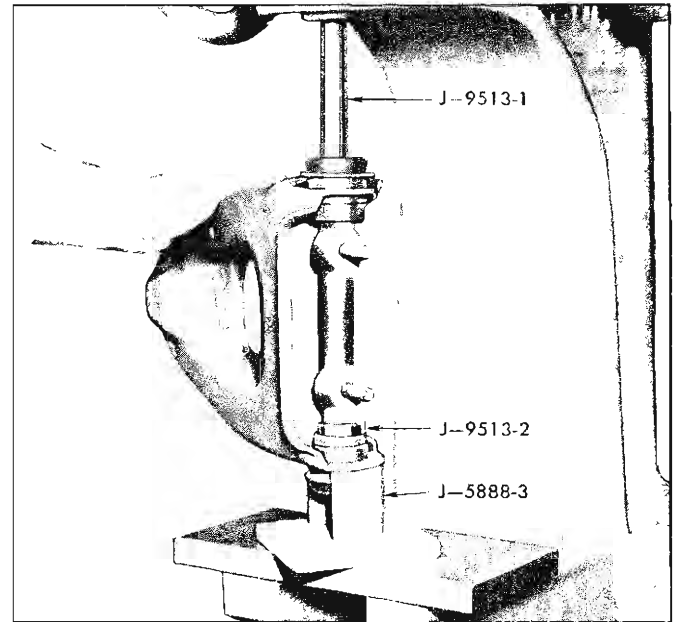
Removing Pivot Shaft Bushing—Chevy II
